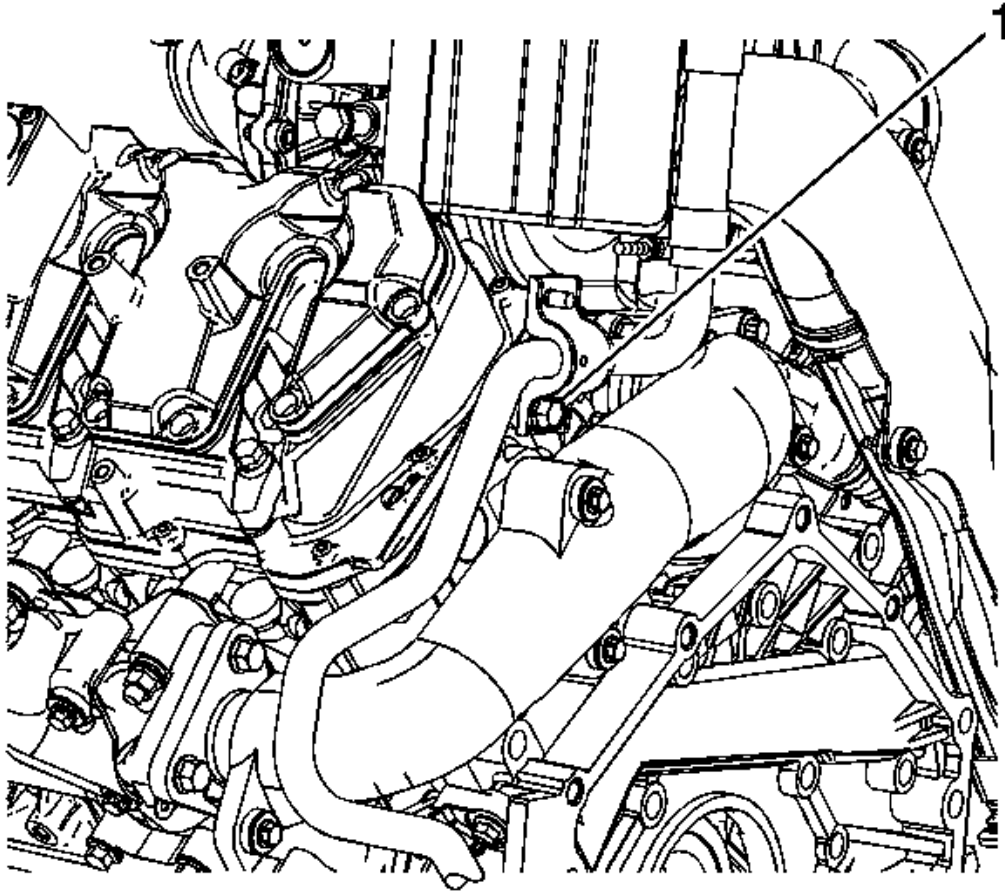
View Of EGR Cooler Pipe Bracket Bolt
